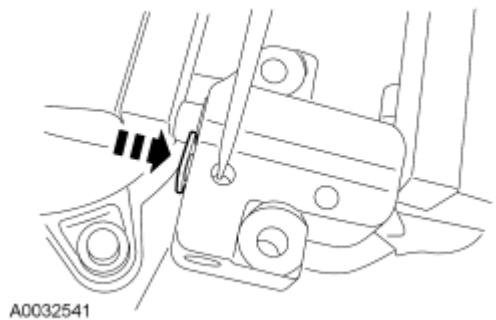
Pushing Ratchet Arm Back Into Tensioner Housing
